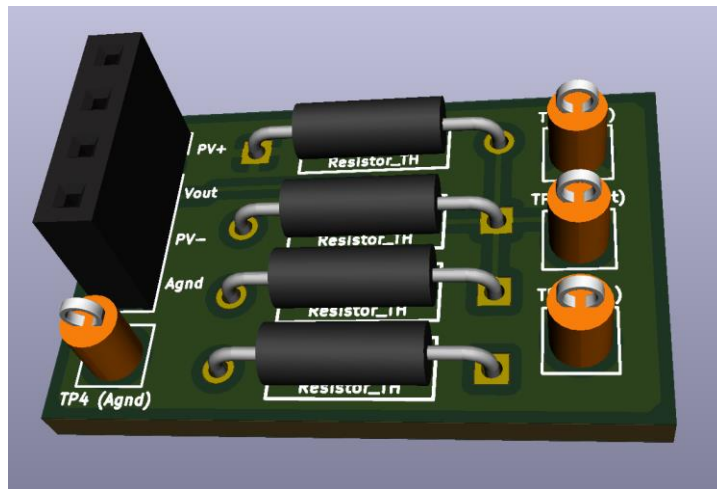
3-D Rendering of Voltage Sensor PCB.
